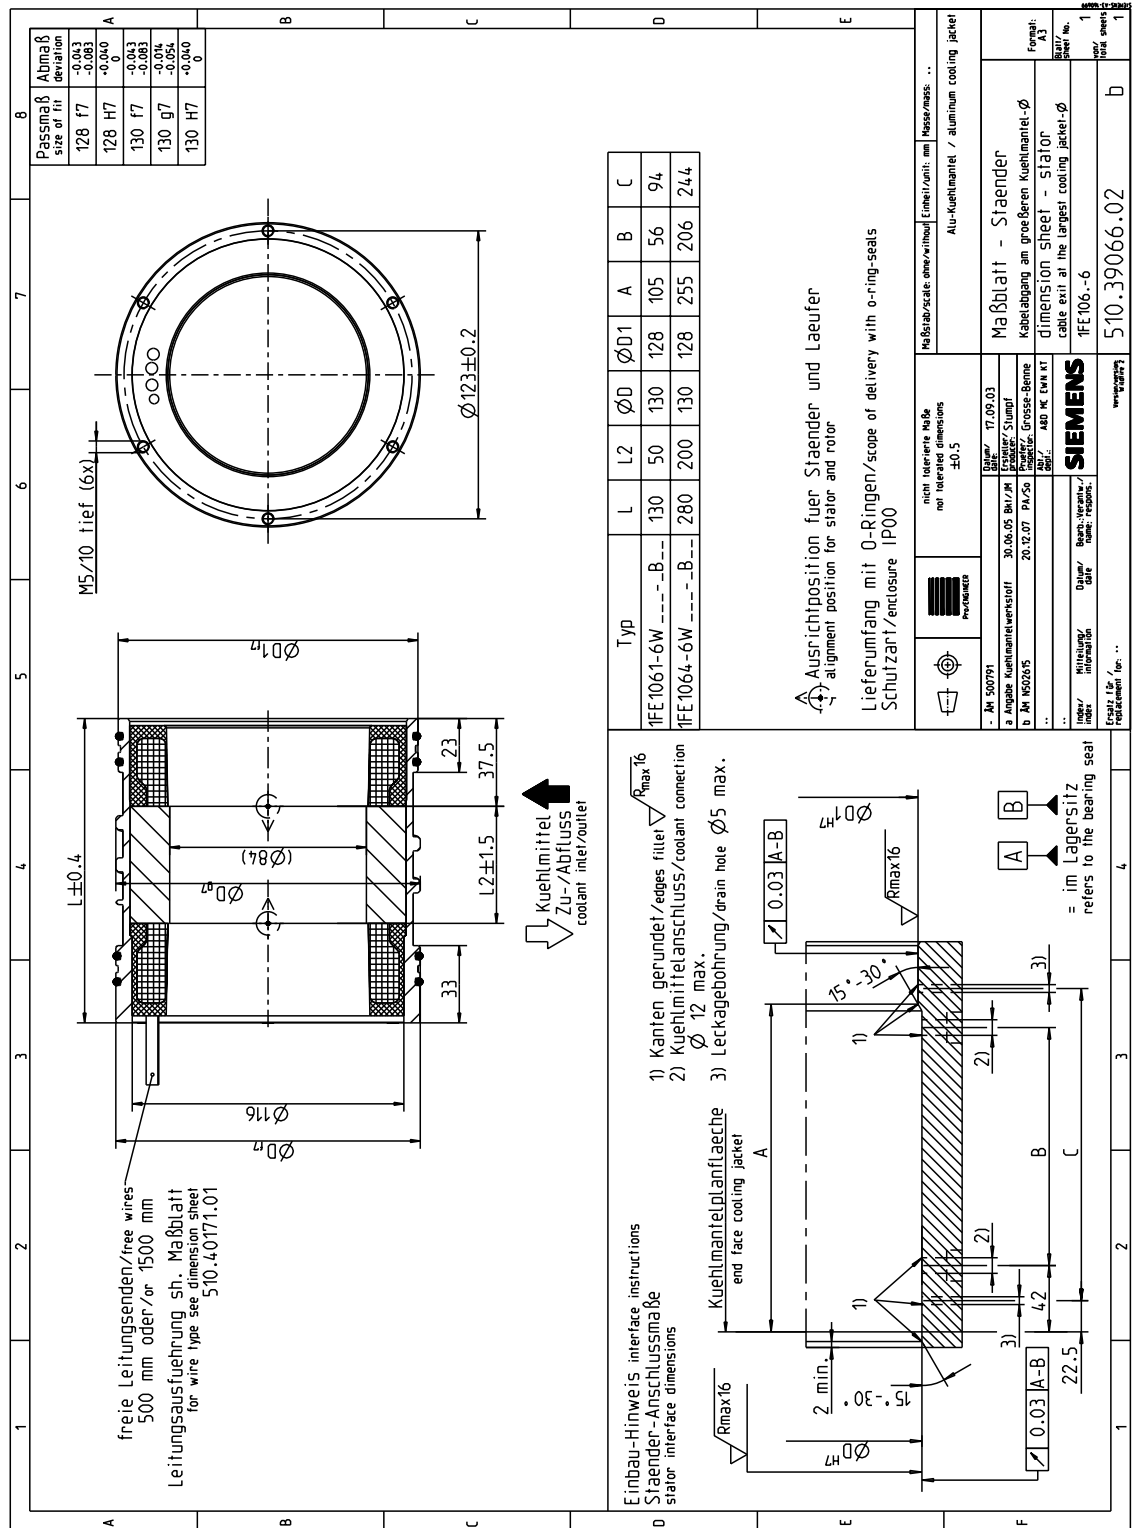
1FE106□-6, stator with cooling jacket, cable outlet at the larger cooling jacket diameter
